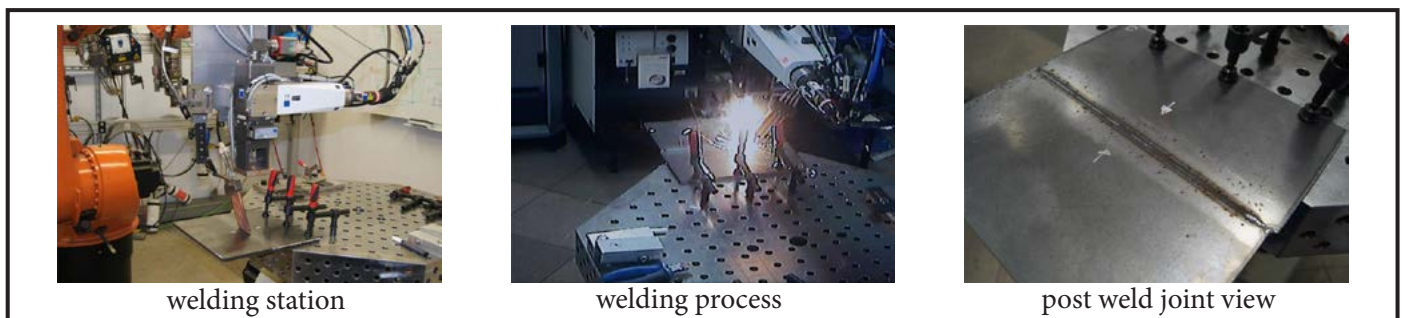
Making a test joint using a TruDisk 12002 disc laser
